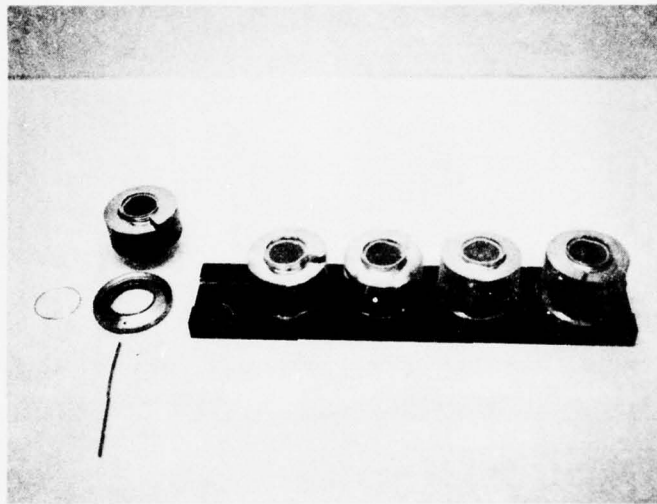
Anode Heat-Pipe to Weld Flange Brazing Fixture: Four subassemblies are shown in the brazing fixture. The distance between the flange and the end of the heat pipe is fixed. The parts which are brazed together, namely, the heat-pipe, flange, braze ring and exhaust tubulation are shown to the left of the fixture.
